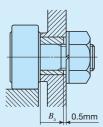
Length of mounting hole for Eccentric Type Cam Followers
